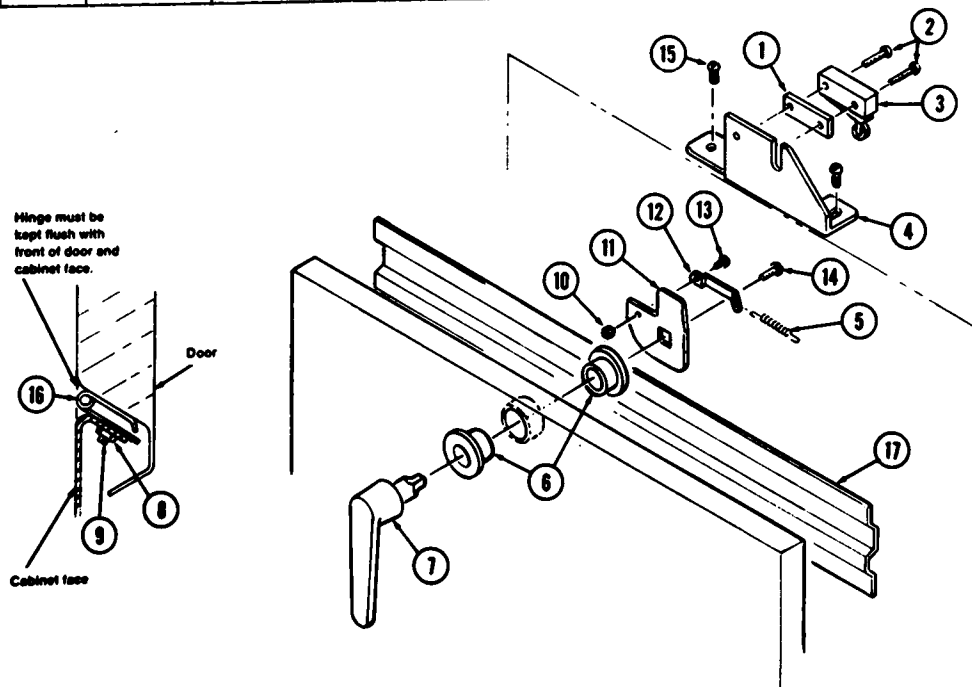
DOOR ASSEMBLY, BOTTOM HINGED.
